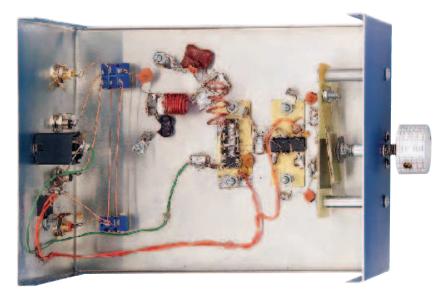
Inside view of transmitter. Note the small pieces of printed circuit board material used to mount the parts "Manhattan" style. Parts mounted on the rear panel (from top to bottom): phono jack for the antenna, phono jack for receiver antenna, key jack, phono jack for receiver power and partly hidden R6, U3, C10 and phono jack for power. S2 and S1 (the blue objects) are to the right. Moving farther to the right, components are C9, C8, L3 and several paralleled capacitors that comprise C7. Still farther to the right: the stretched out L2, U2 (mounted on a piece of brass), R4, C5, R5 and C6. U1 is mounted on the next piece of brass. R3, R2 and C4 are wired to U1. Next come C3, R1, L1 and C1, all mounted "Manhattan" style. The crystal is glued to the back of the compression capacitor and blocked from view.
